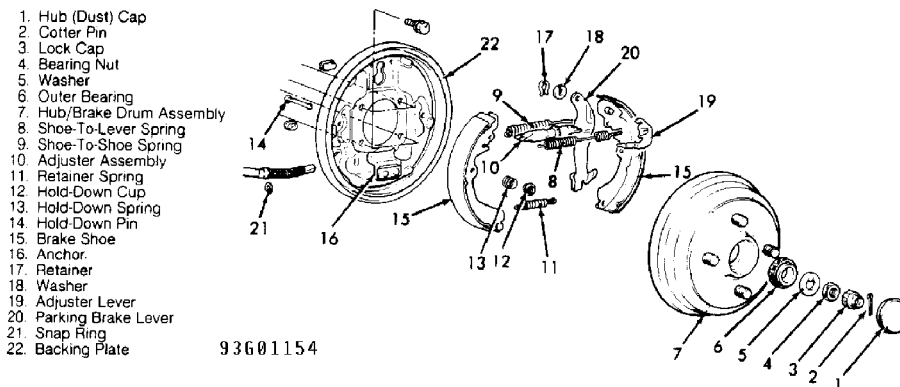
Exploded View Of Rear Brake Assembly (Galant)
